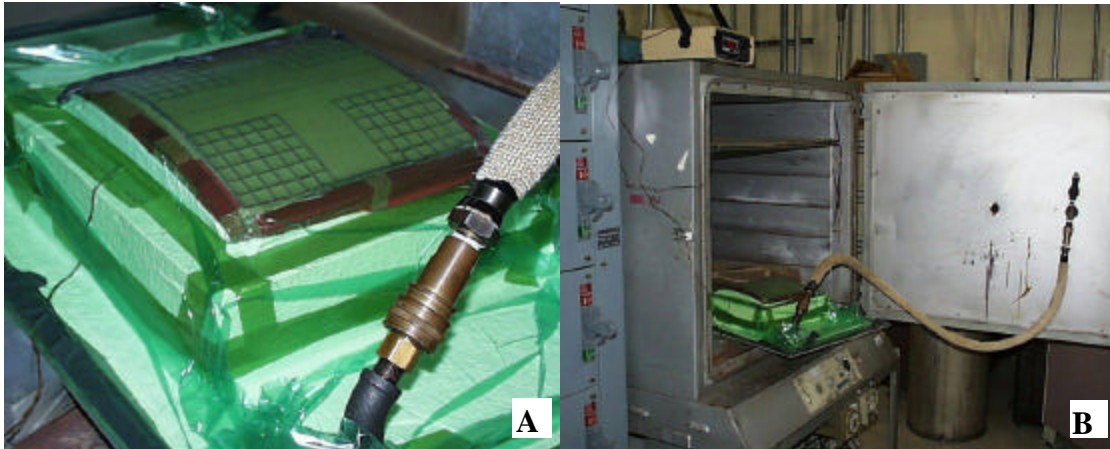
A) Uncured 8" x 8" Curved Cruciform Panel Vacuum Bagged on Al Forming Tool; B) Vacuum Curing Oven with LOM Part/Forming Tool
